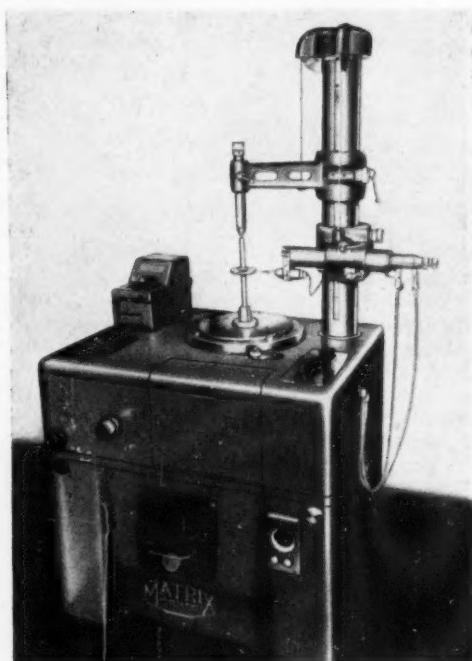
Matrix Machine for Checking Gears for Tooth Spacing and Concentricity
